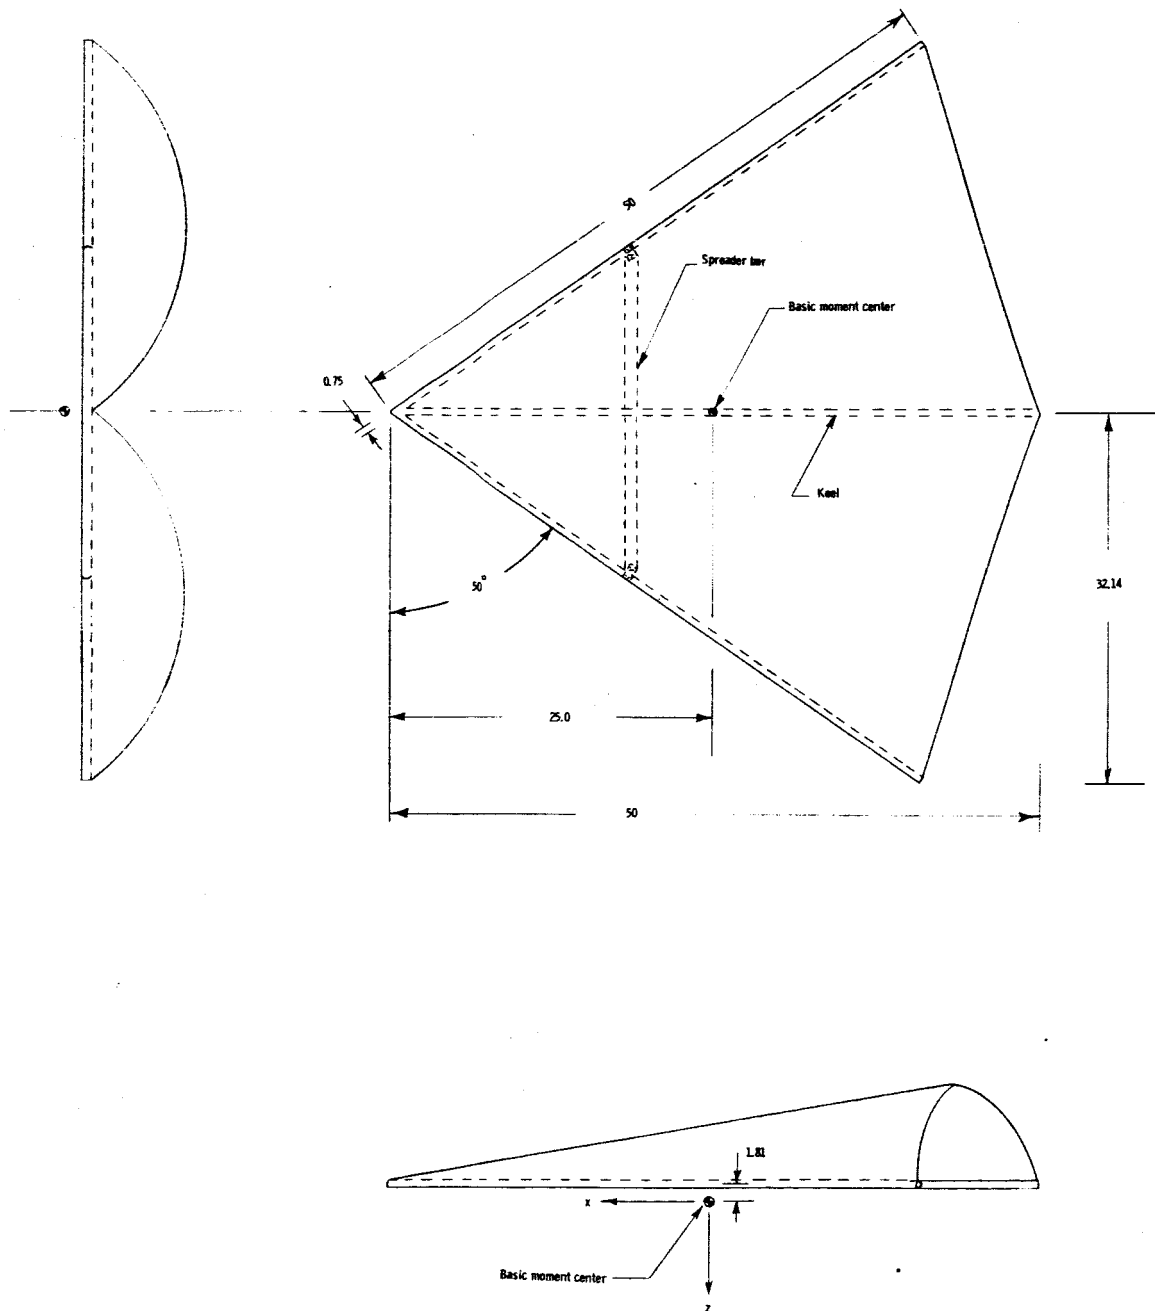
Geometry of the deployed parawing model. Dimensions are given in inches.
